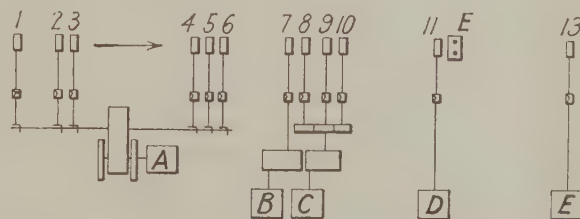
Gear Drive with Multiple Motors, Applied to a 14-In. Continuous Skelp Mill, with Spacing Similar to That in Fig. 1. The motors include
